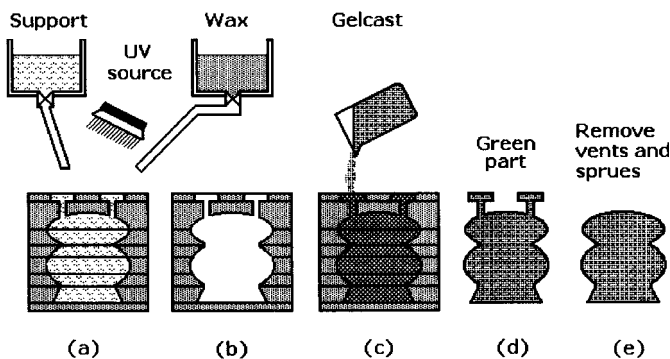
Mold Shape Deposition Manufacturing (MSDM): Casting molds can be formed in successive layers: Wax for the mold and water-soluble photopolymer to support the cavity are deposited in a repetitive cycle to build the mold in layers whose thickness and number depend on the mold's shape (a). UV energy solidifies the photopolymer. The photopolymer support material is removed by soaking it in hot water (b). Materials such as polymers and ceramics can be cast in the wax mold. For ceramic parts, a gelcasting ceramic slurry is poured into the mold to form green ceramic parts, which are then cured (c). The wax mold is then removed by heat or a hot liquid bath and the green ceramic part released (d). After furnace firing (e) any vents and sprues are removed.
